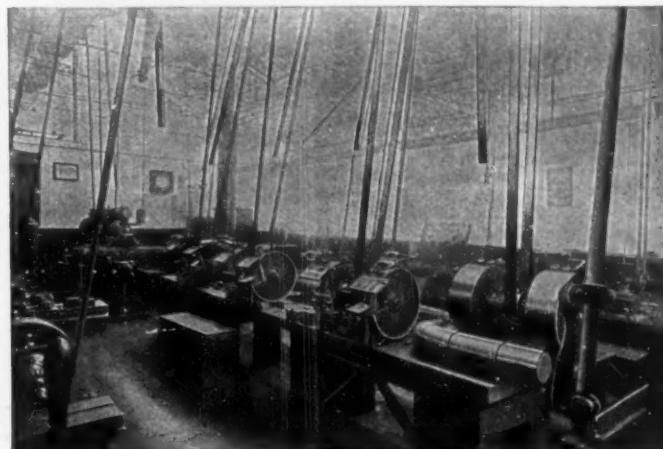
A MODEL INSTALLATION OF NAIL DIE GRINDERS. NOTE SAFETY HOODS, PLATE GLASS GUARD, EXHAUST CONNECTIONS AND THE ARRANGEMENT OF LIGHTS.
